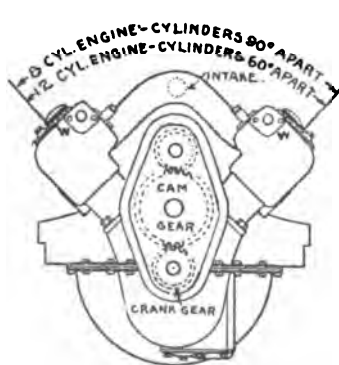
Eight cylinder "V" type engine, with cylinders placed at an angle of 90° apart. One cam gear operates the valves on both sides of the "L" shaped cylinders. There are four cylinders on each side, usually "in block." Crank shaft is a four cylinder type (180°) crank, with two connecting rods to each crank pin.
